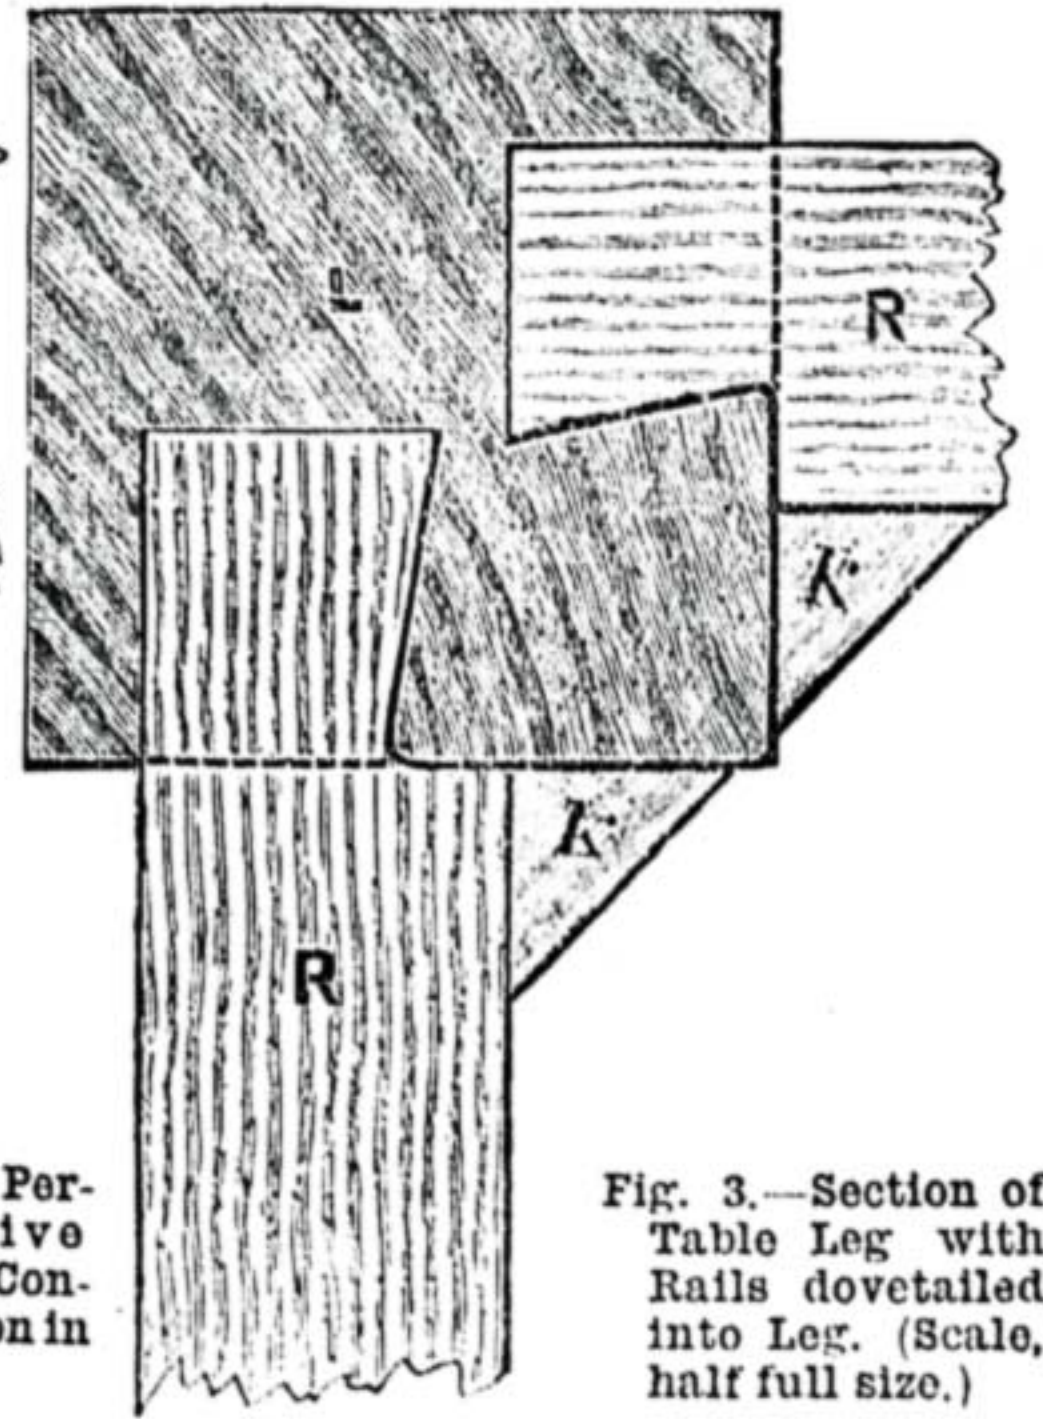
Section of Table Leg with Rails dovetailed into Leg. (Scale, half full size.)
